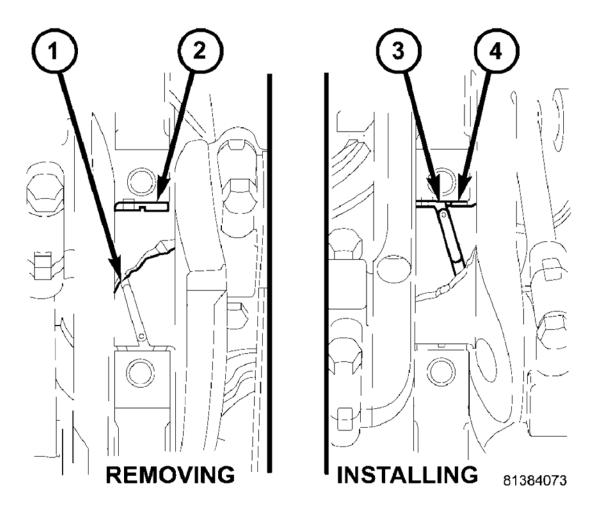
Removing/Installing Upper Main Bearing With Special Tool C- 3059 Courtesy of CHRYSLER LLC
